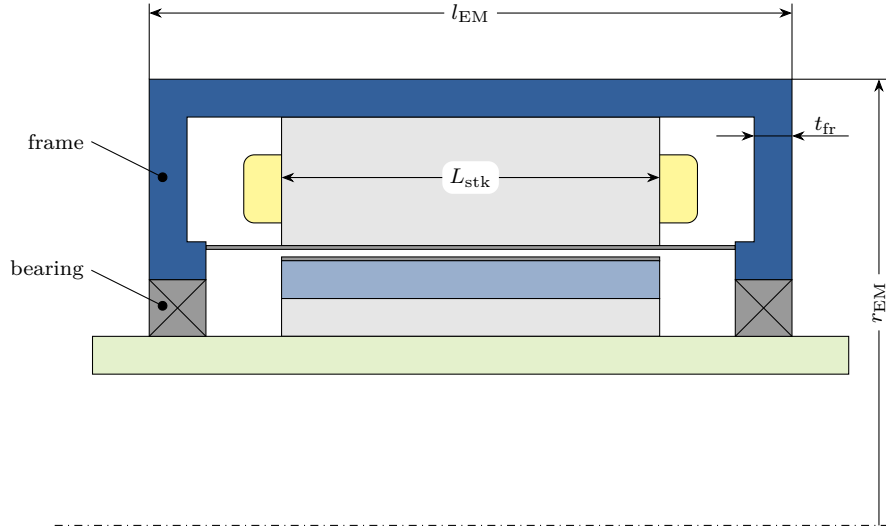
Axial cross-section of a surface permanent magnet synchronous machine including passive parts.
